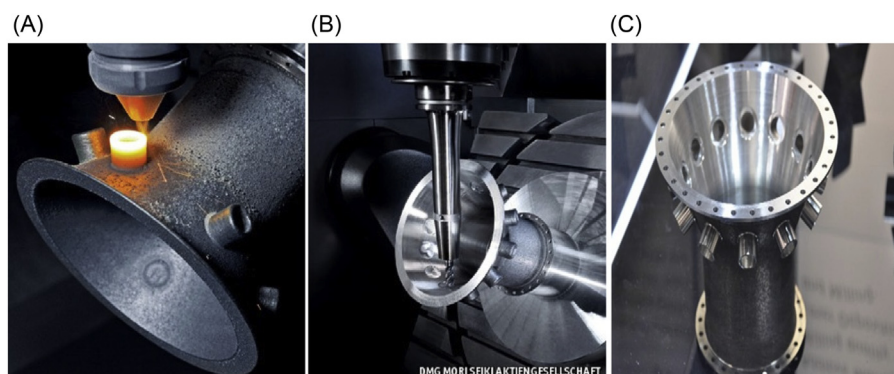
Turbine housing fabricated by the LASERTEC 65 3D System using (A) multi-axis deposition and (B) multi-axis machining. (C) Finished part.
